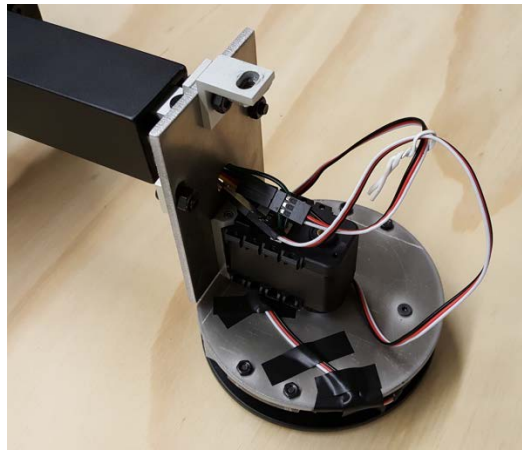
FOIL CUTTER WITHOUT HOUSING
